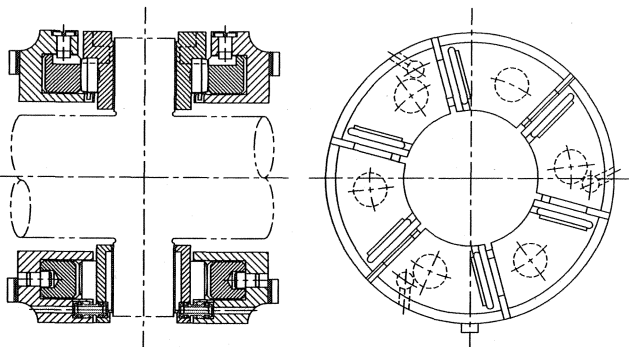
Leading Edge Groove Tilting Pad Thrust Bearing.
